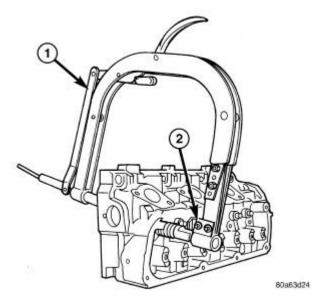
VALVE SPRING - REMOVE/INSTALL Courtesy of CHRYSLER LLC
